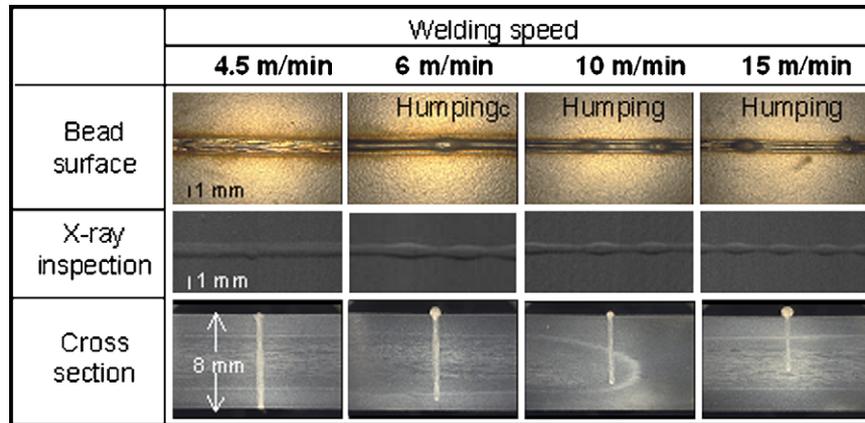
Surface appearances, X-ray inspection results and cross sections of weld beads produced at various welding speeds with a 130 μm -tightly focused fiber laser beam.
